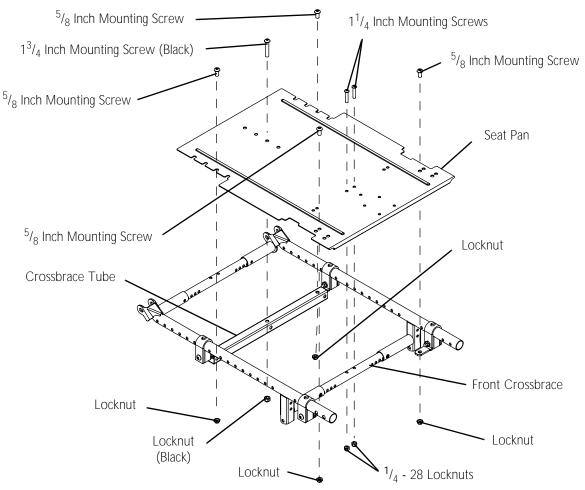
Drop Mount - 18 - 22 Inch Deep Seat Frames
